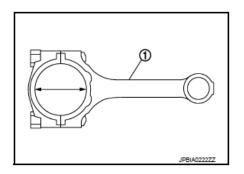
Identifying Connecting Rod Courtesy of NISSAN MOTOR CO., U.S.A.
